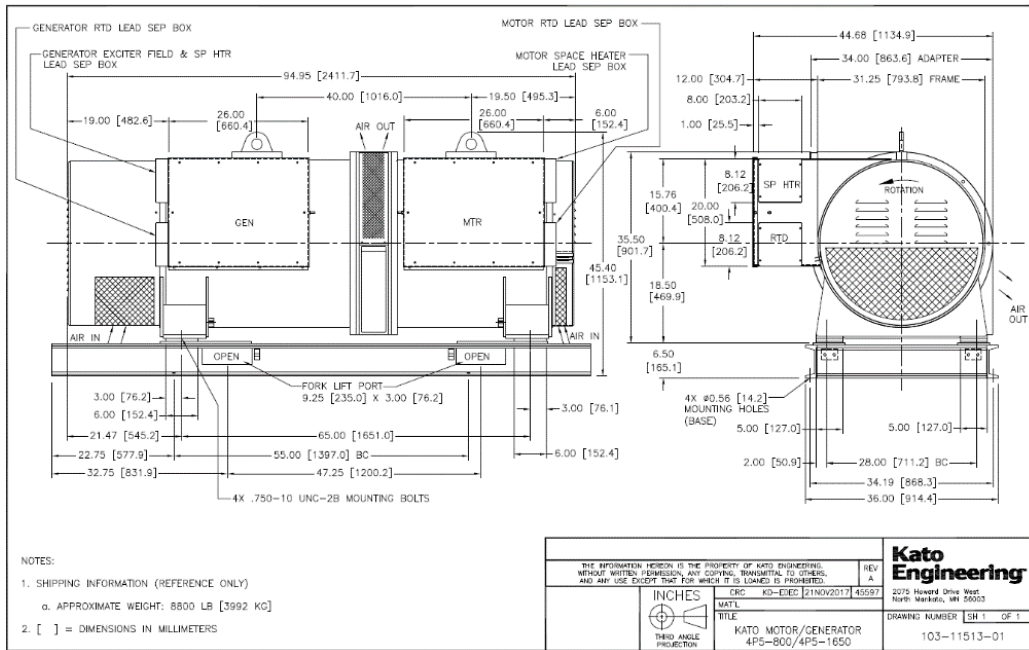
Dimensioned drawing of the KATO MG set as fabricated.
